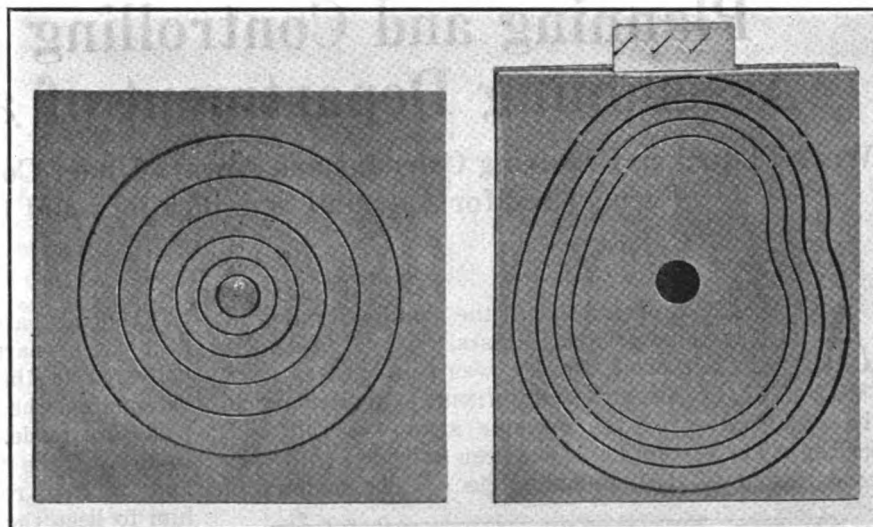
CAMS AND RINGS CUT BY GODFREY MACHINE
